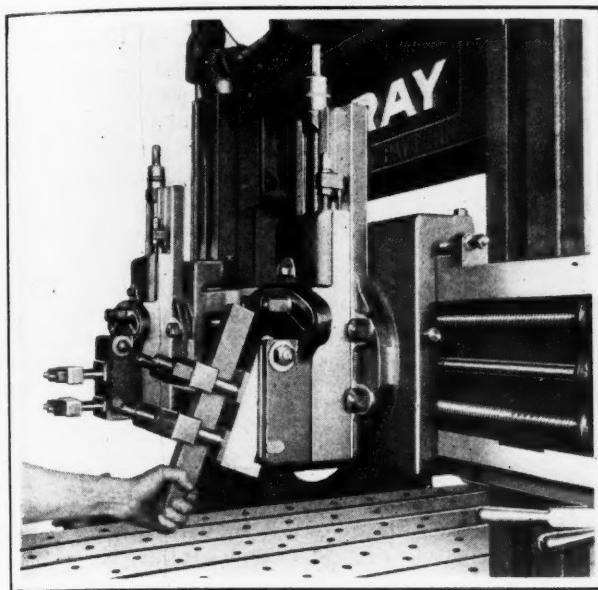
View of Planer Head, showing Abutment and "Twin-purpose" Taper Gibs
